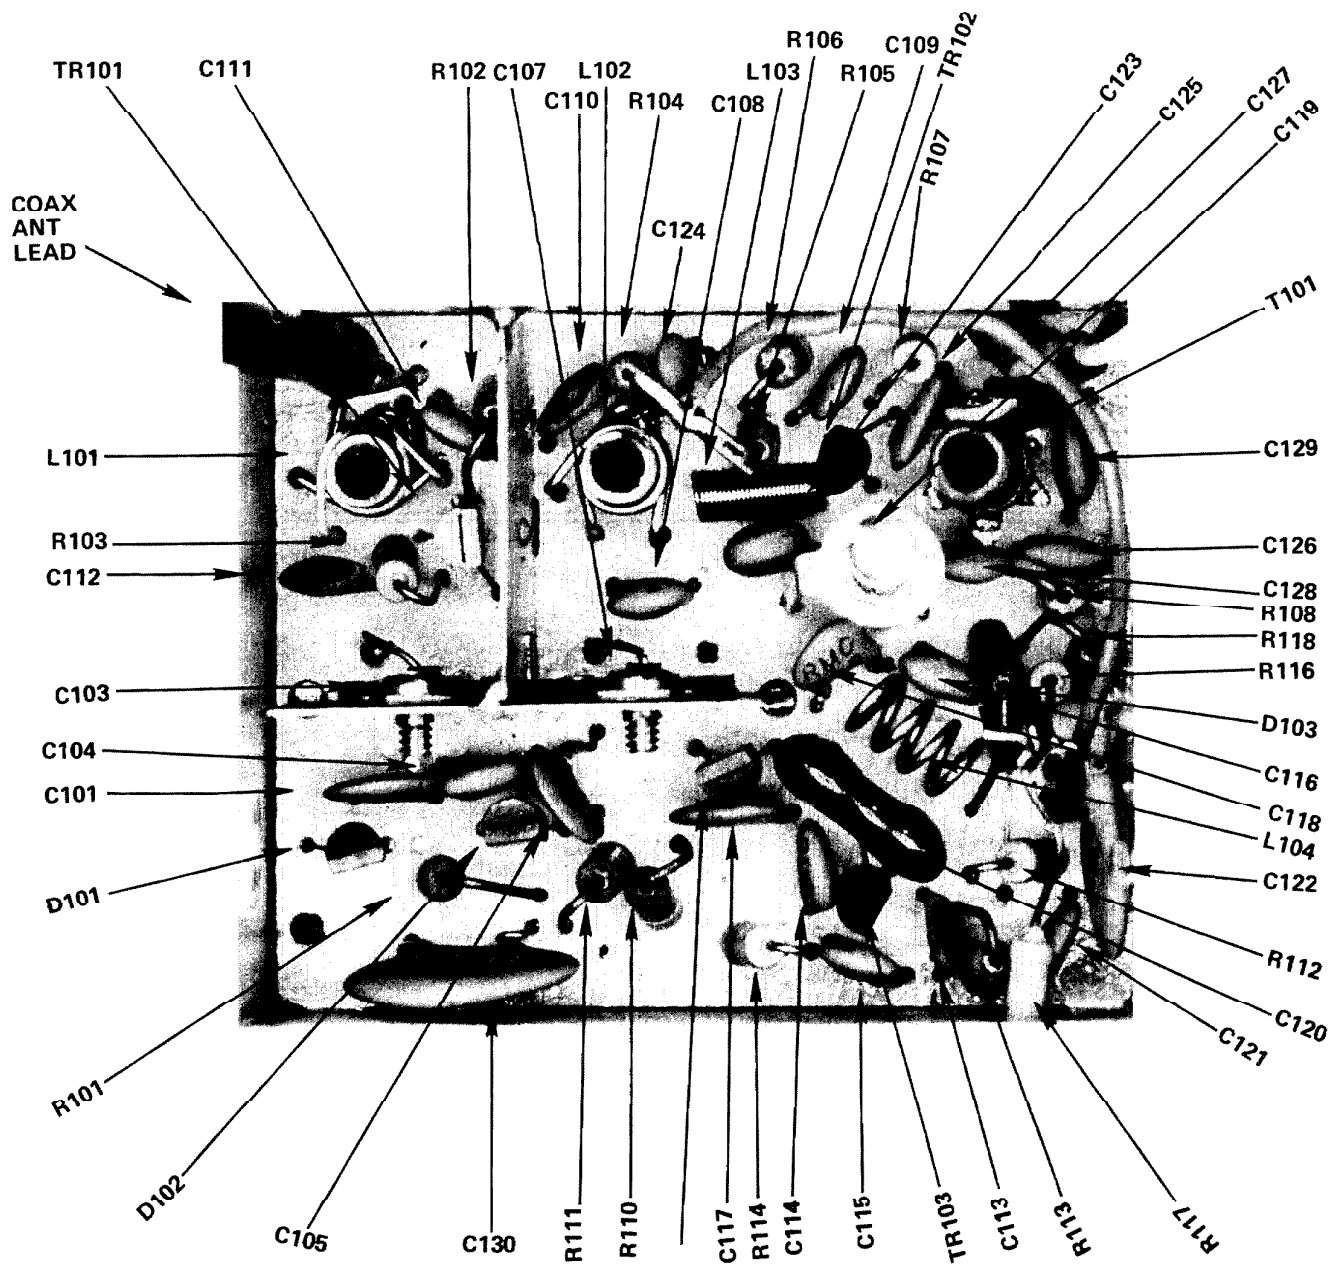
TOP VIEW FM RF TUNER PC ASSEMBLY
